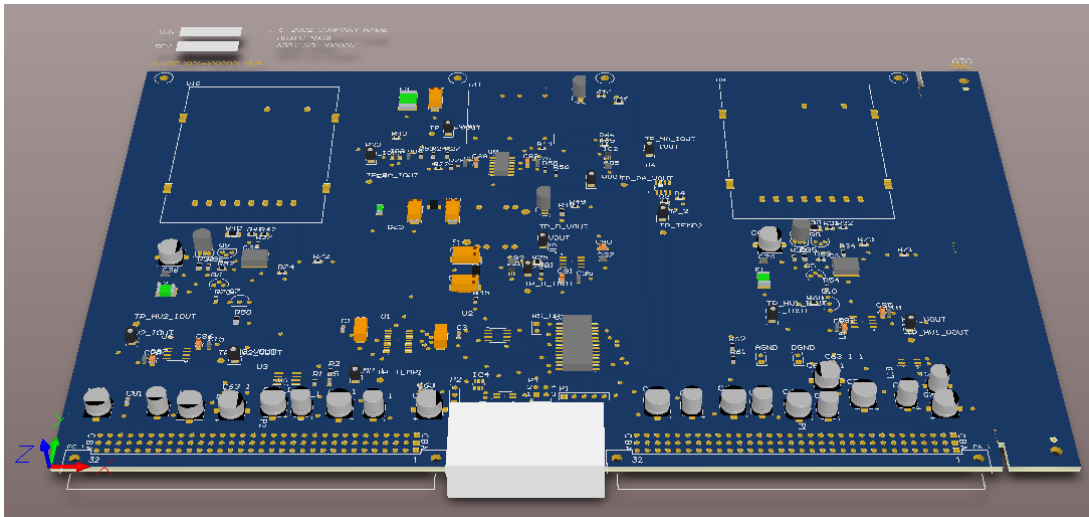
3D printed circuit board of the Power Supplies board.
